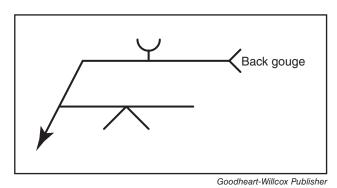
Follow this sequence for welding a V-groove weld and U-groove back gouge.
